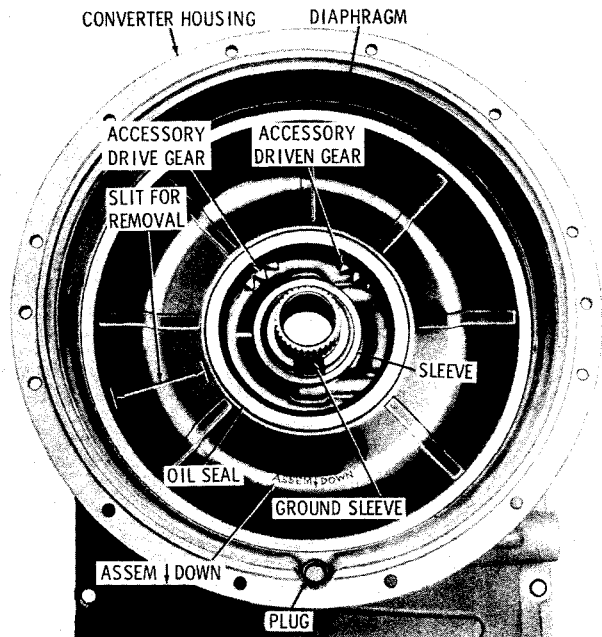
Torque converter housing—front view (models with "dry" converter housing)
